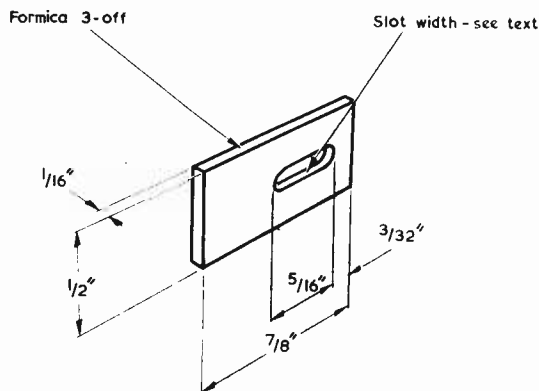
One of three Formica pieces which assist in holding the 'Ringer' in position
